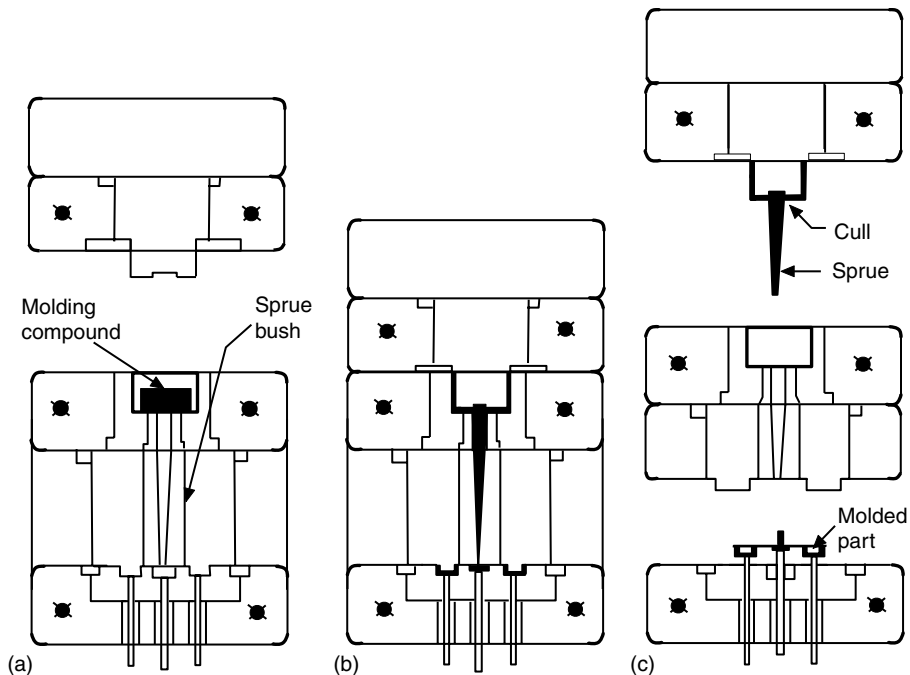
Molding cycle of a pot-type transfer mold. (a) Molding compound is placed in the transfer pot and then (b) forced under pressure when hot through an orifice and into a closed mold. (c) When the mold opens, the sprue remains with the cull in the pot, and the molded part is lifted out of the cavity by ejector pins. (After Frados, J. ed. 1976. *Plastics Engineering Handbook*, 4th Ed., Van Nostrand Reinhold, New York.)
